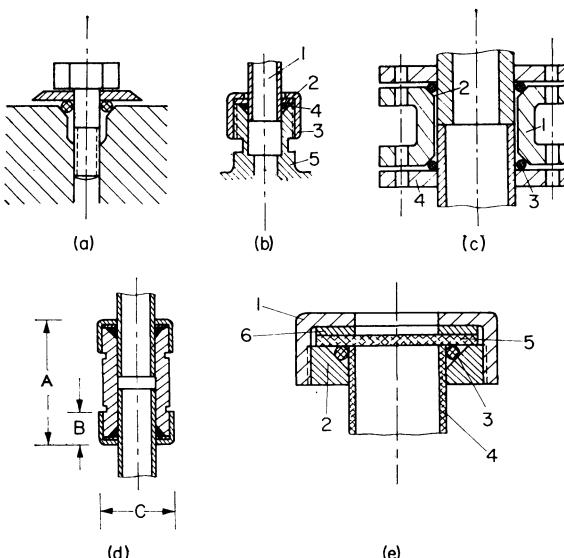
Seals having the conical part on vacuum side: (a) plug seal; (b) pipe-to-vessel seal; (c, d) pipe-to-pipe seal; (e) end plate seal
